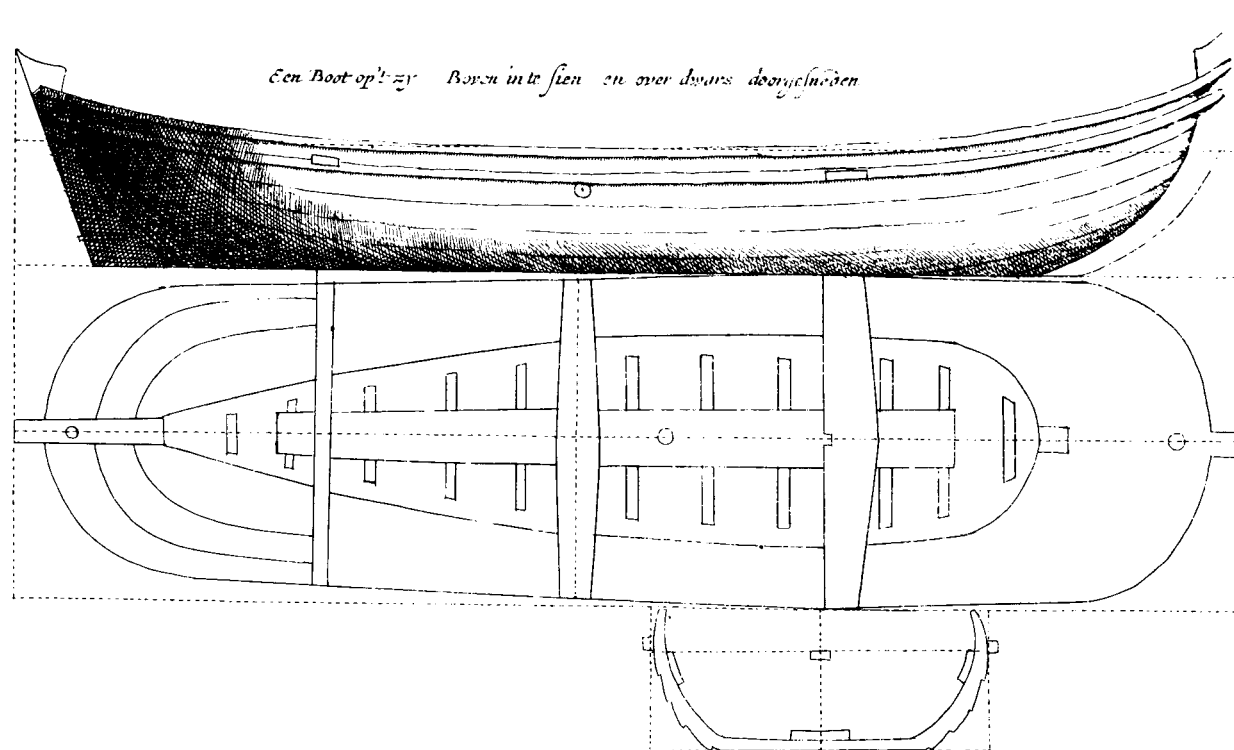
Plate LXVI. A boat to be seen from the side, from above, and in cross section.
